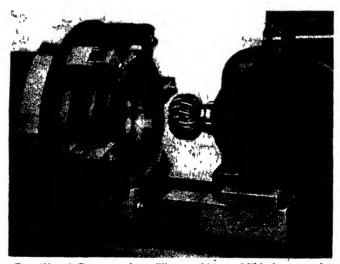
A Cross rotating milling machine, or Mil-lathe, at work.
